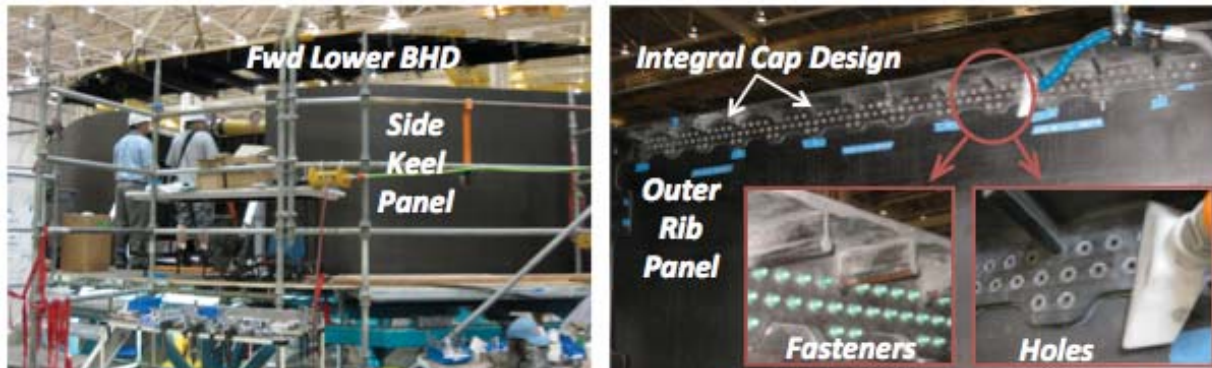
Integral panel-to-panel joining techniques are used to reduce joint weight and assembly cost.
